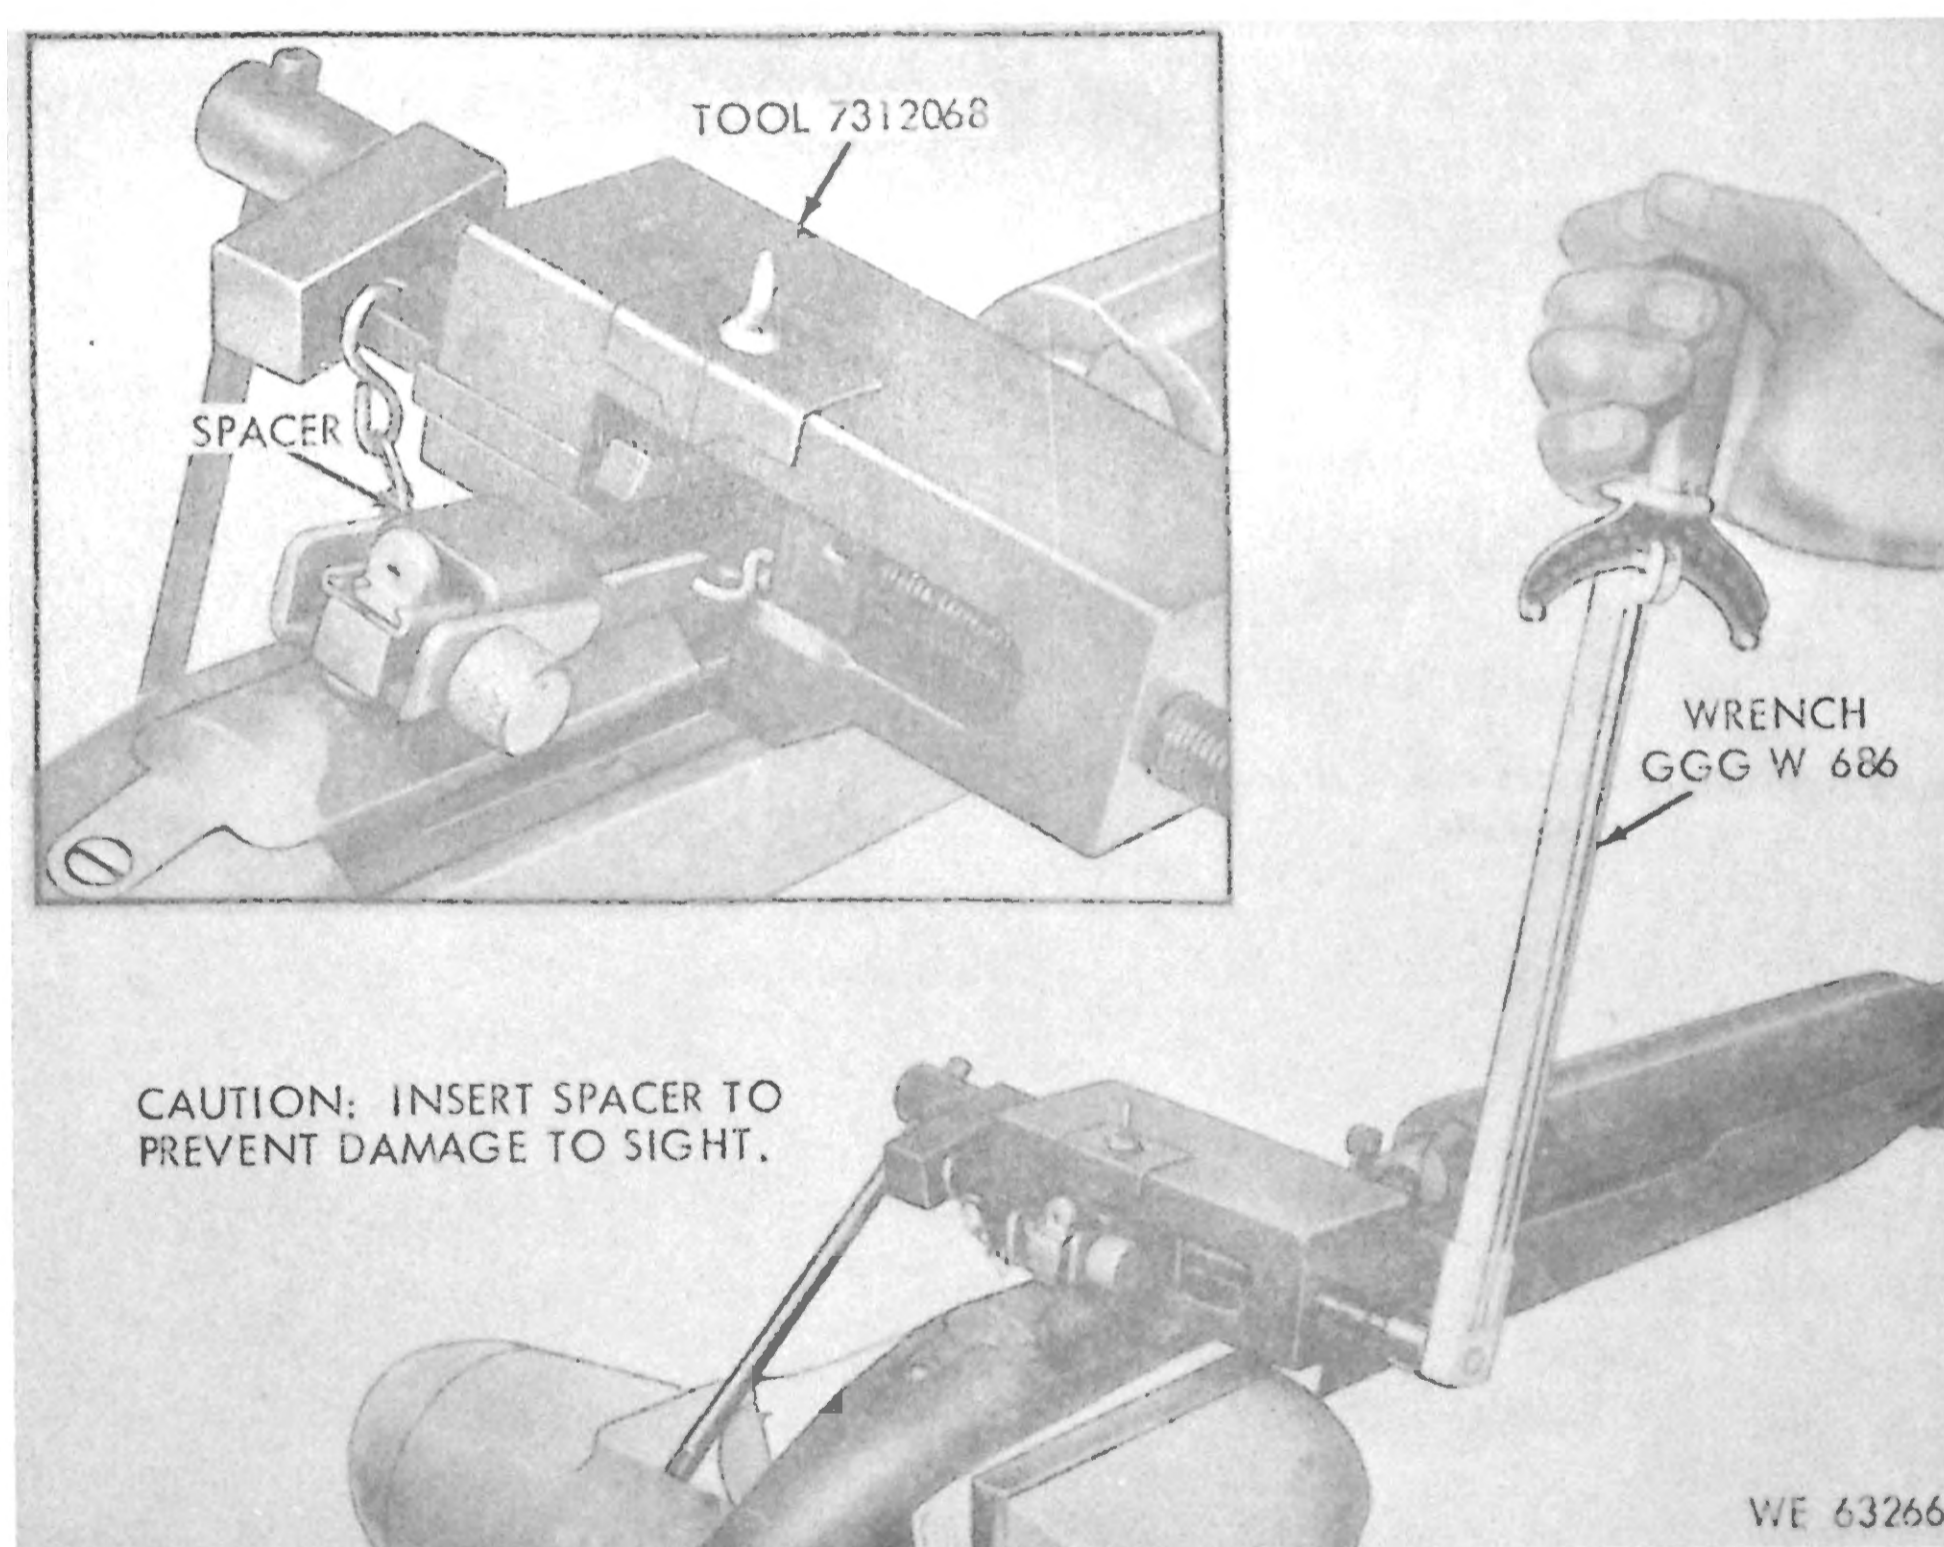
Installing rear sight, using tool 7312068 and torque wrench GGG W 686.
